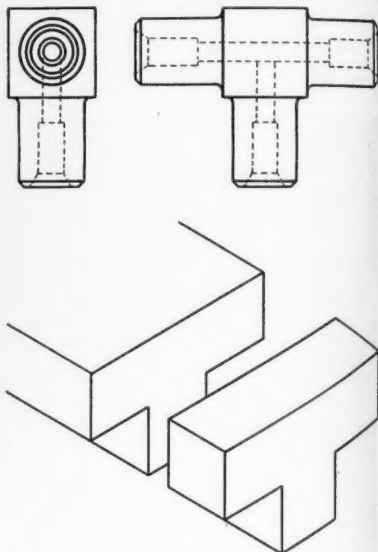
Above is Shown the Design of a Tee made from the Extruded Stock Shown in the Lower Part of the Illustration
